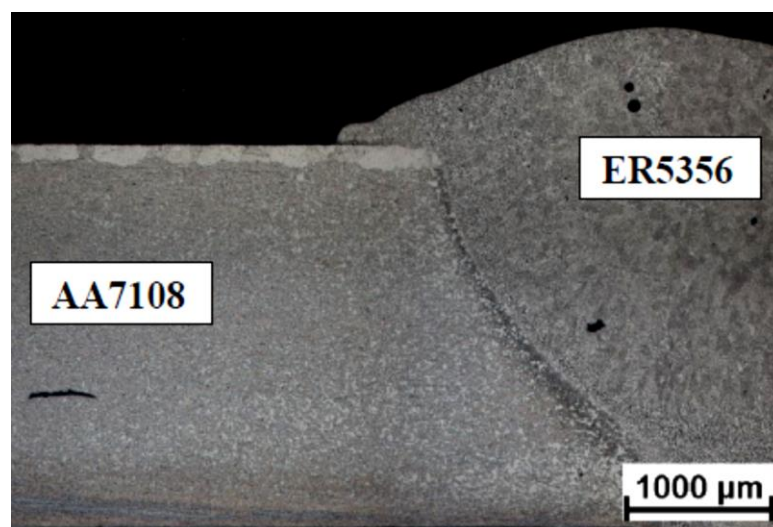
Cross-sections of a weld revealing the presence of overlap and embossment of weld metal beyond the weld toe observed in lap-joint configuration A1.
